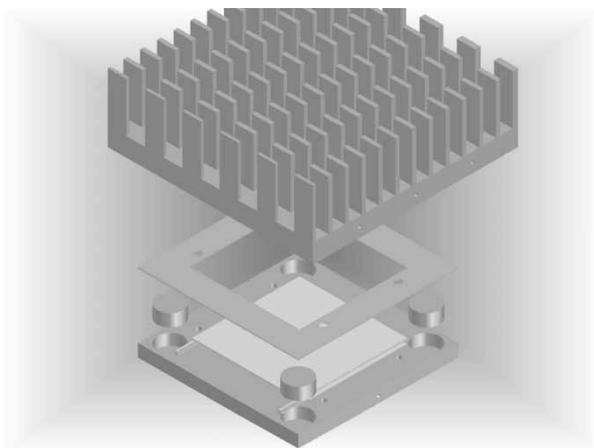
CAD drawing of the magnetic TEG housing. Four—12 mm diameter, 5 mm thick samarium-cobalt disc magnets are placed inside of the aluminium housing
